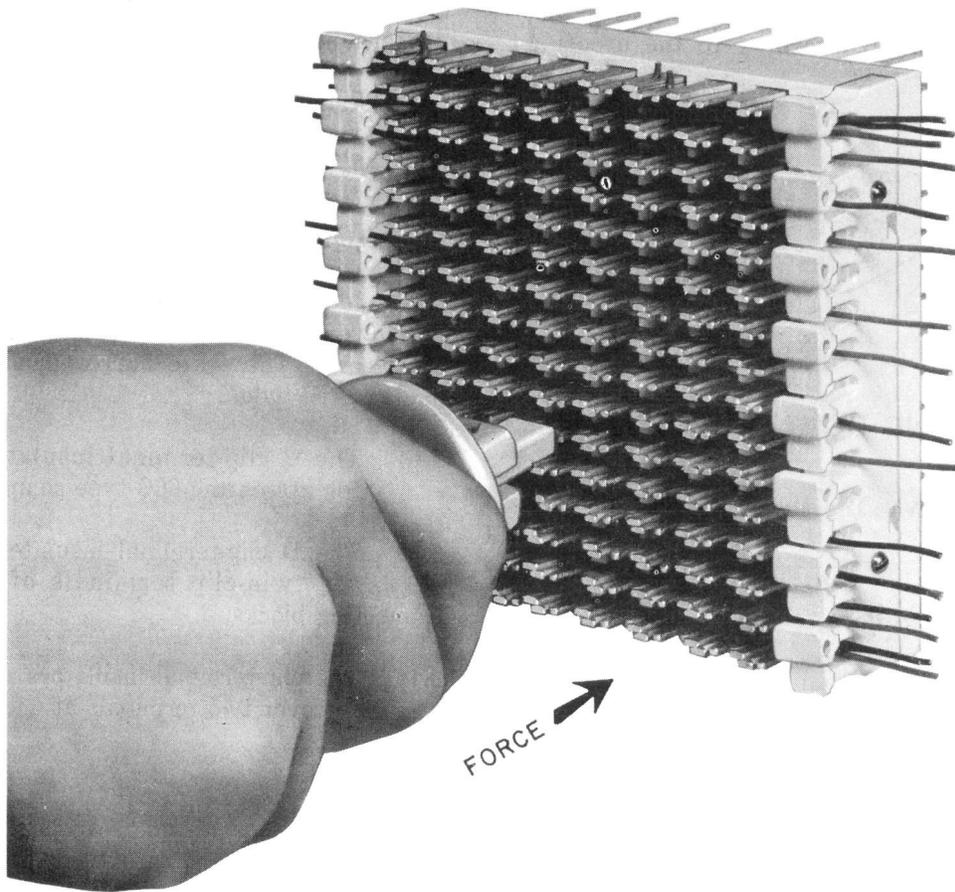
Use of 714E2 Tool With 66H-Type Block
